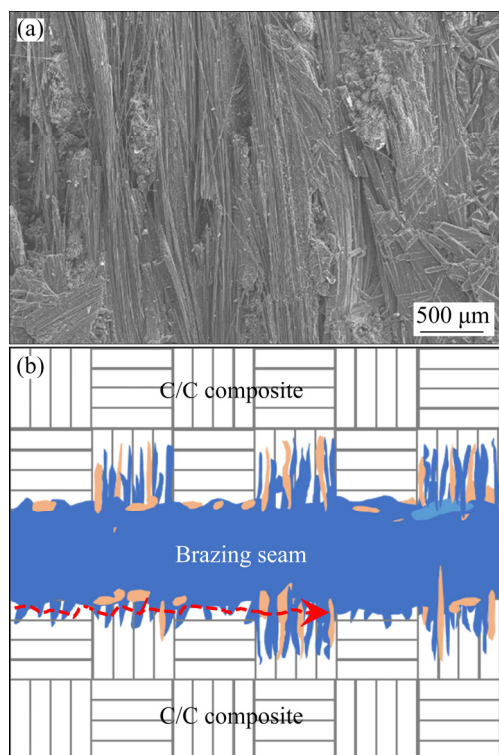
Morphology of fracture surface of C/C joint after shear test: (a) Fracture surface (1120 °C); (b) Crack initiation position
